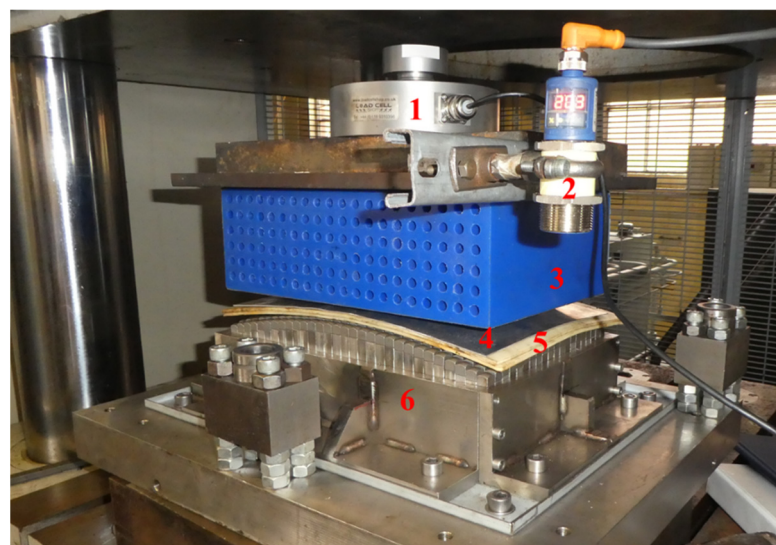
The experimental setup of the hole-type rubber multipoint forming. 1—Force Cell; 2—Displacement sensor; 3—Hole-type rubber punch; 4—Sheet blank; 5—Rubber cushion; 6—Lower pin matrix.
